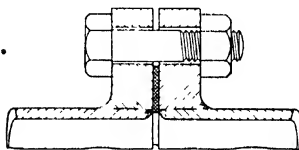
FLANGES WELDED ON BACK AND FRONT
